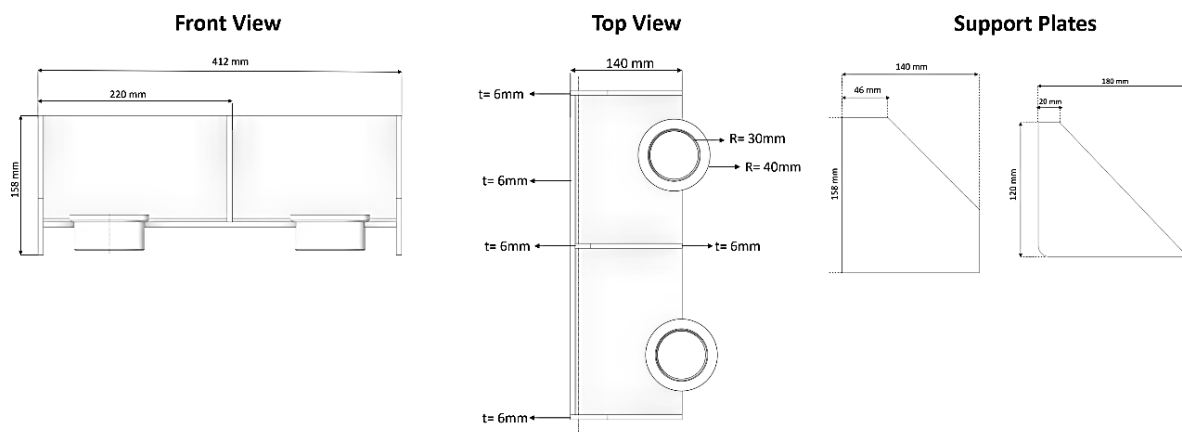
Dimensional representation of the motor mounting bracket with geometric constraints and support plate configuration
